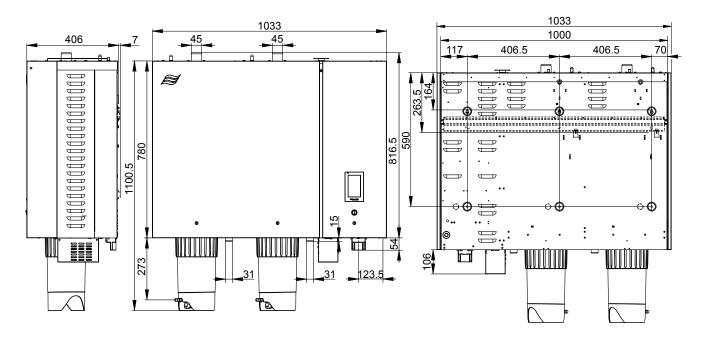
Unit dimensions unit "M" (dimensions in mm)
